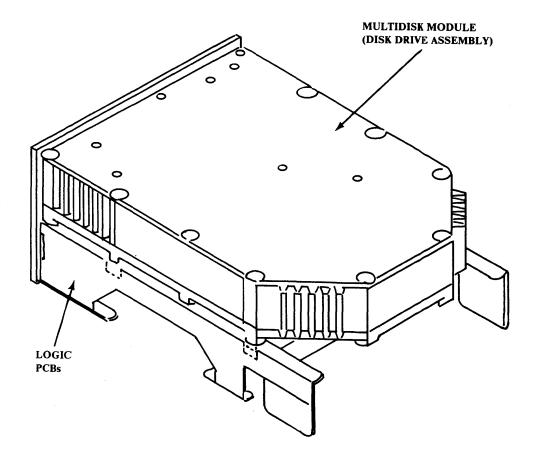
Multidisk Module (Disk Drive Assembly)
